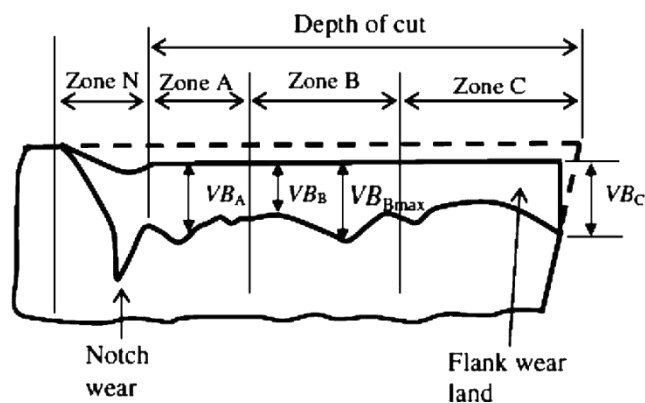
Side view of cutting tool showing flank wear (ISO3685)
